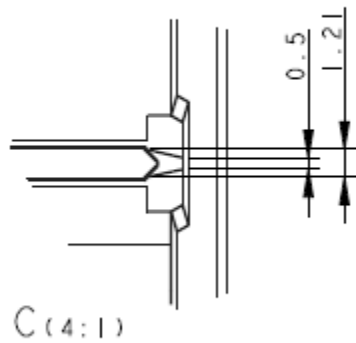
MiTAC E8020 Capri Dimension (C Detail)
